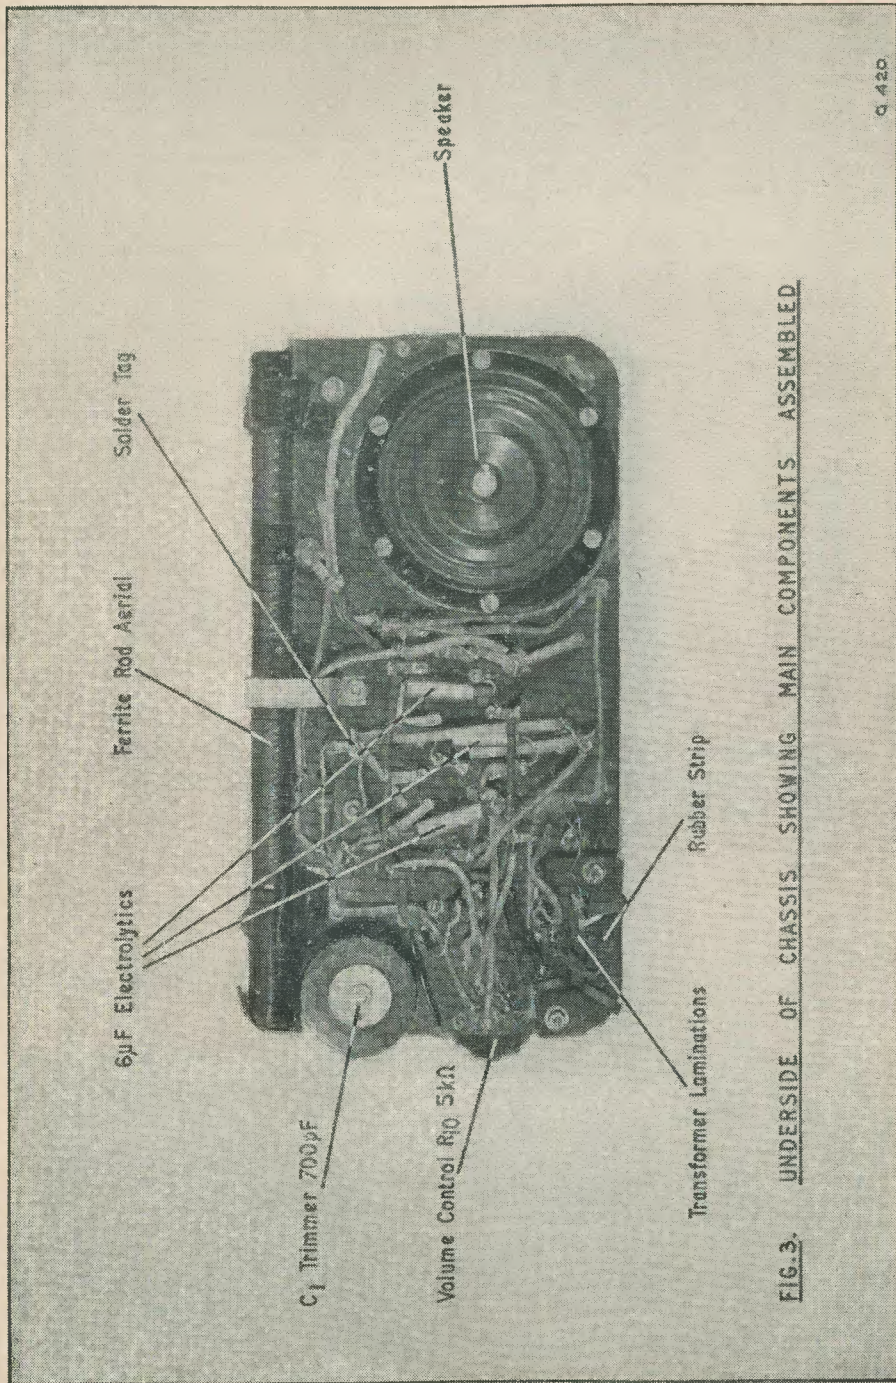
UNDERSIDE OF CHASSIS SHOWING MAIN COMPONENTS ASSEMBLED
